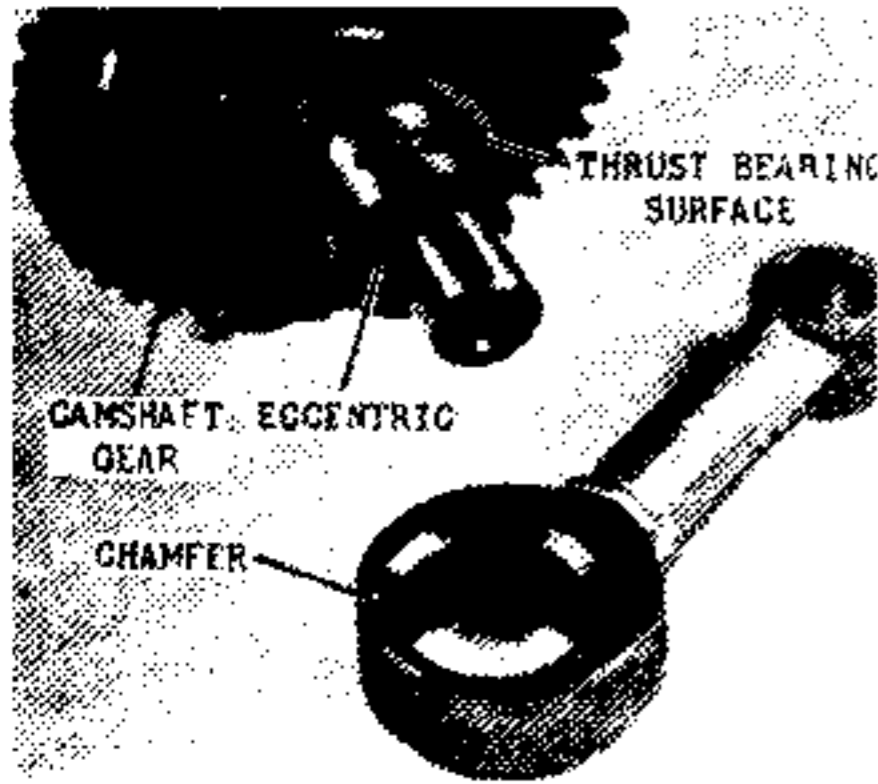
View of early type oil pump used on Models VH70, VM70 and VM80. Chamfered face of drive collar should be towards camshaft gear.
